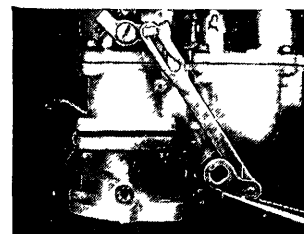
Install fast idle connector link, throttle shaft arm and pin, washer and spring
